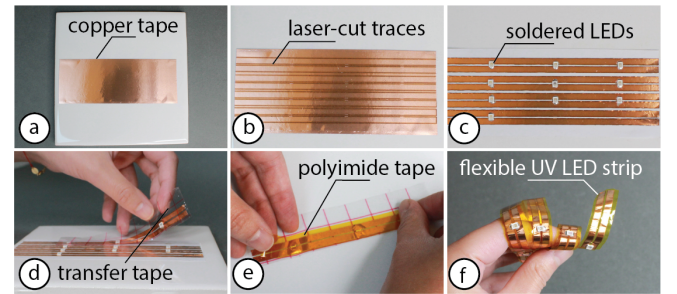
Fabrication process of custom UV LED strip with fiber laser cutting.
